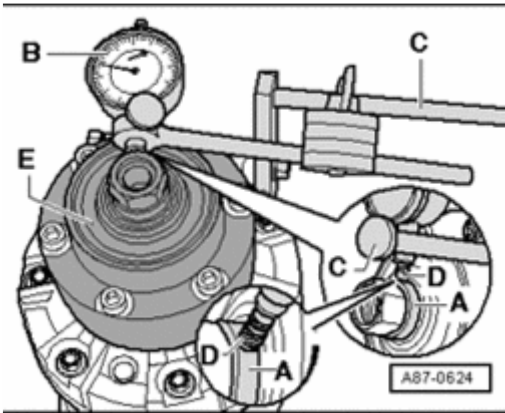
Run-Out Of Drive Plate With Overload Protection, Checking/Adjusting
